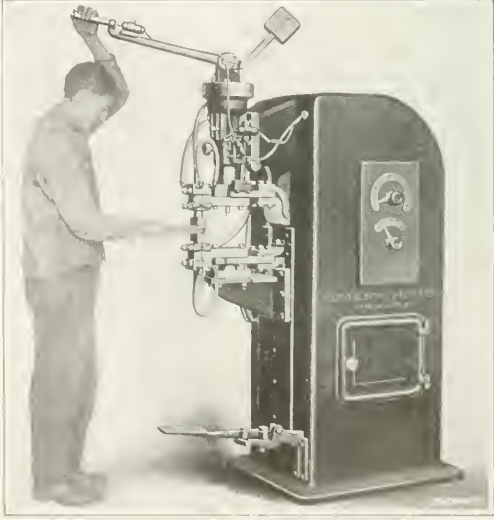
Toledo Spot-welding Machine welding High-speed Steel Insert to a Lathe Tool. At a Current Cost of Three Cents per Kilowatt-hour, the Cost should not exceed \$3 for welding 800 Pieces of 3/4 by 1 1/2 by 2 Inch High-speed Steel—a Day's Work
